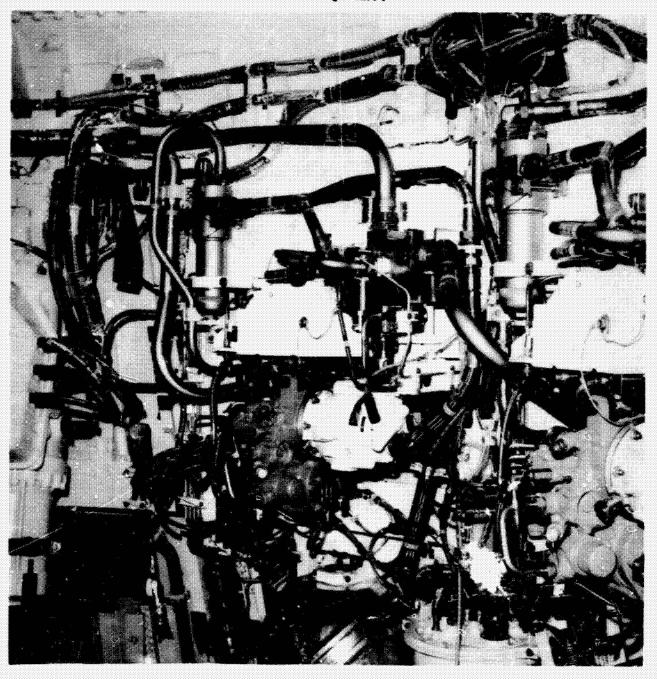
SRB-TVC assembly showing APU, hydraulic pump, check valve and filter assembly, and fluid manifold assembly (STS-3 photograph).
